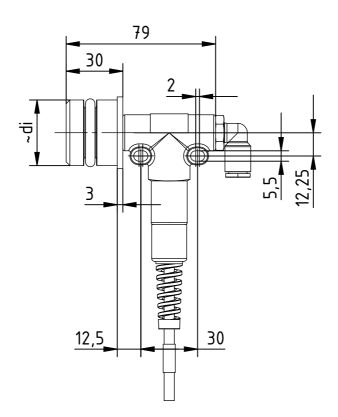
Dimensions EAR36E/R discharge adapter radial
